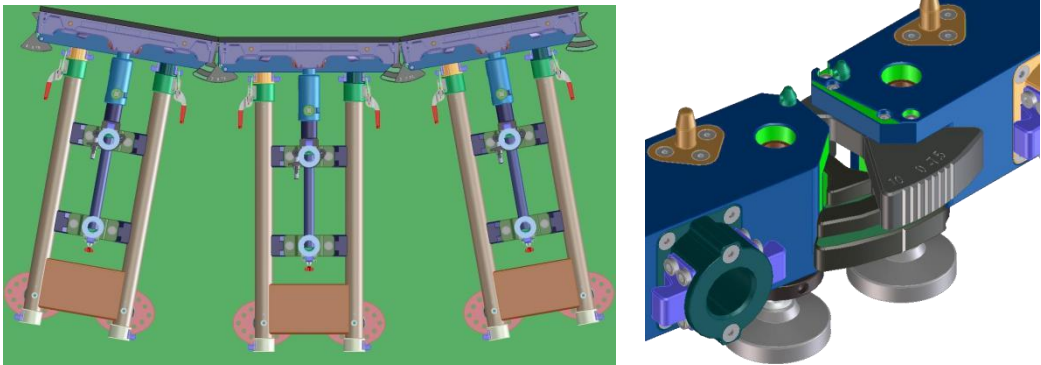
Interior Arc Splicing Floor Installation Diagram
